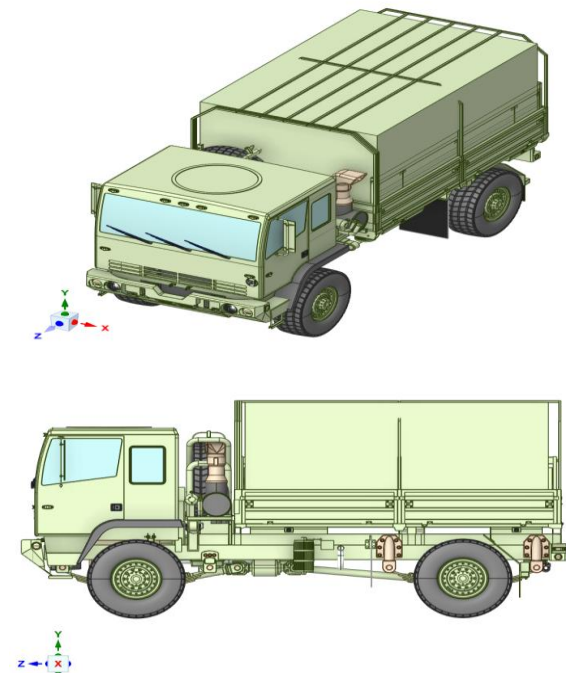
Original CAD assembly of off-highway (military-type) chassis
